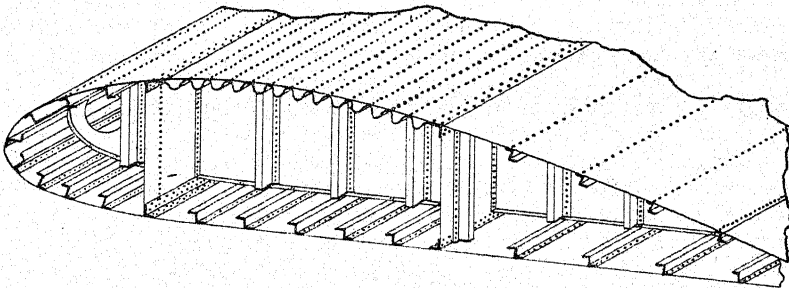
Airplane wing section showing present all-metal airplane construction of riveted 24 ST Alclad.
